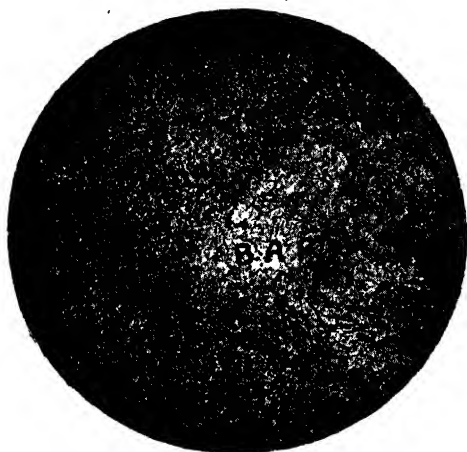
NITRIDE LINES IN ARC WELD TO A MAGNIFICATION
